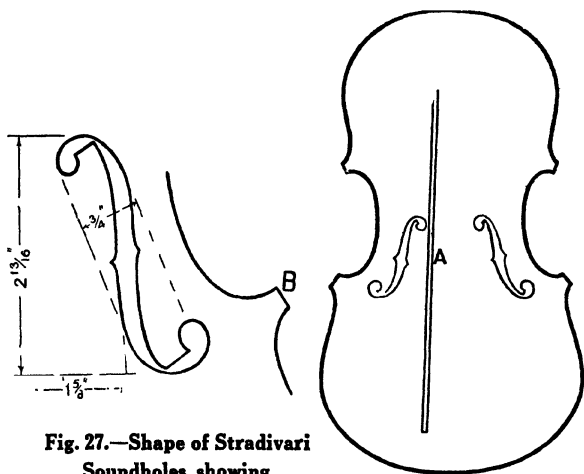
Shape of Stradivari Soundholes showing position on Belly.
